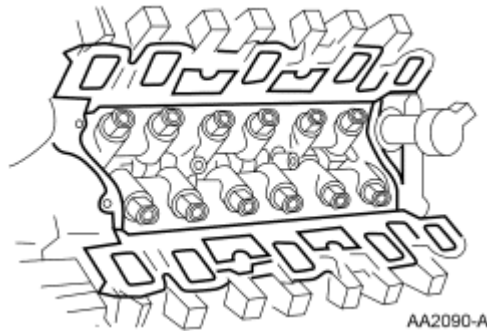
Using Plastic Scraping Tool To Remove All Traces Of Old Sealant
